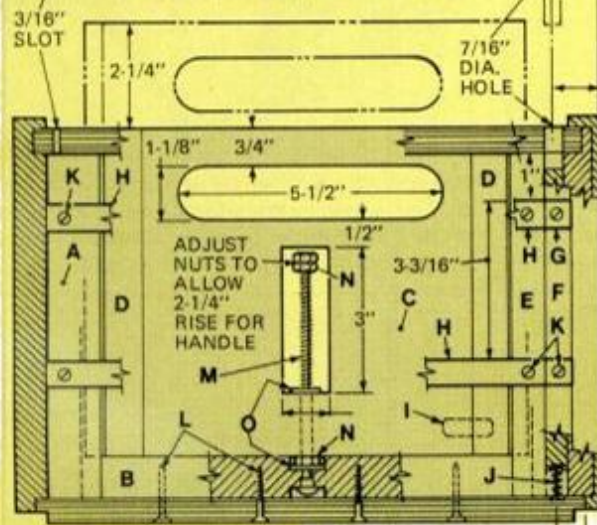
TOP VIEW OF HANDLE CUTOUT
